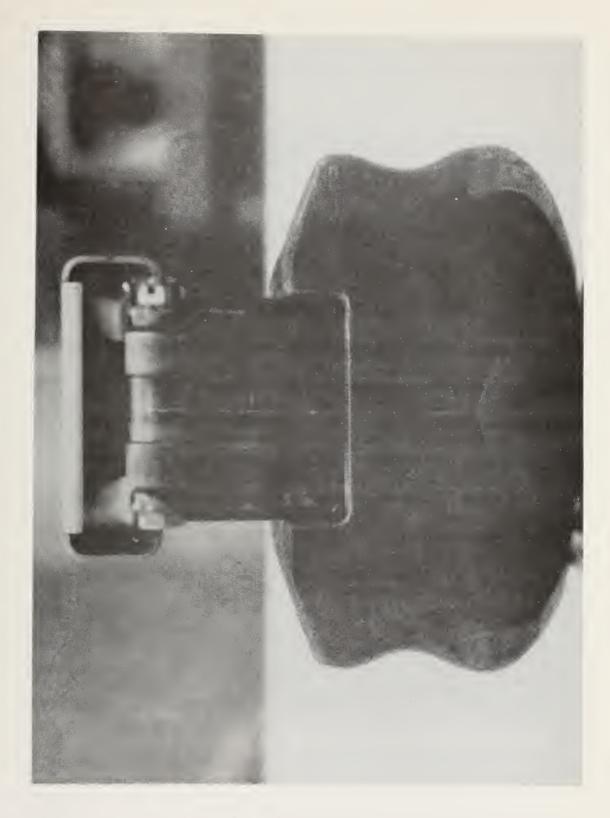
Back view of hook point-boss joint showing the hook point flanges fitted on each side of the shank to prevent rotation about the boss.
